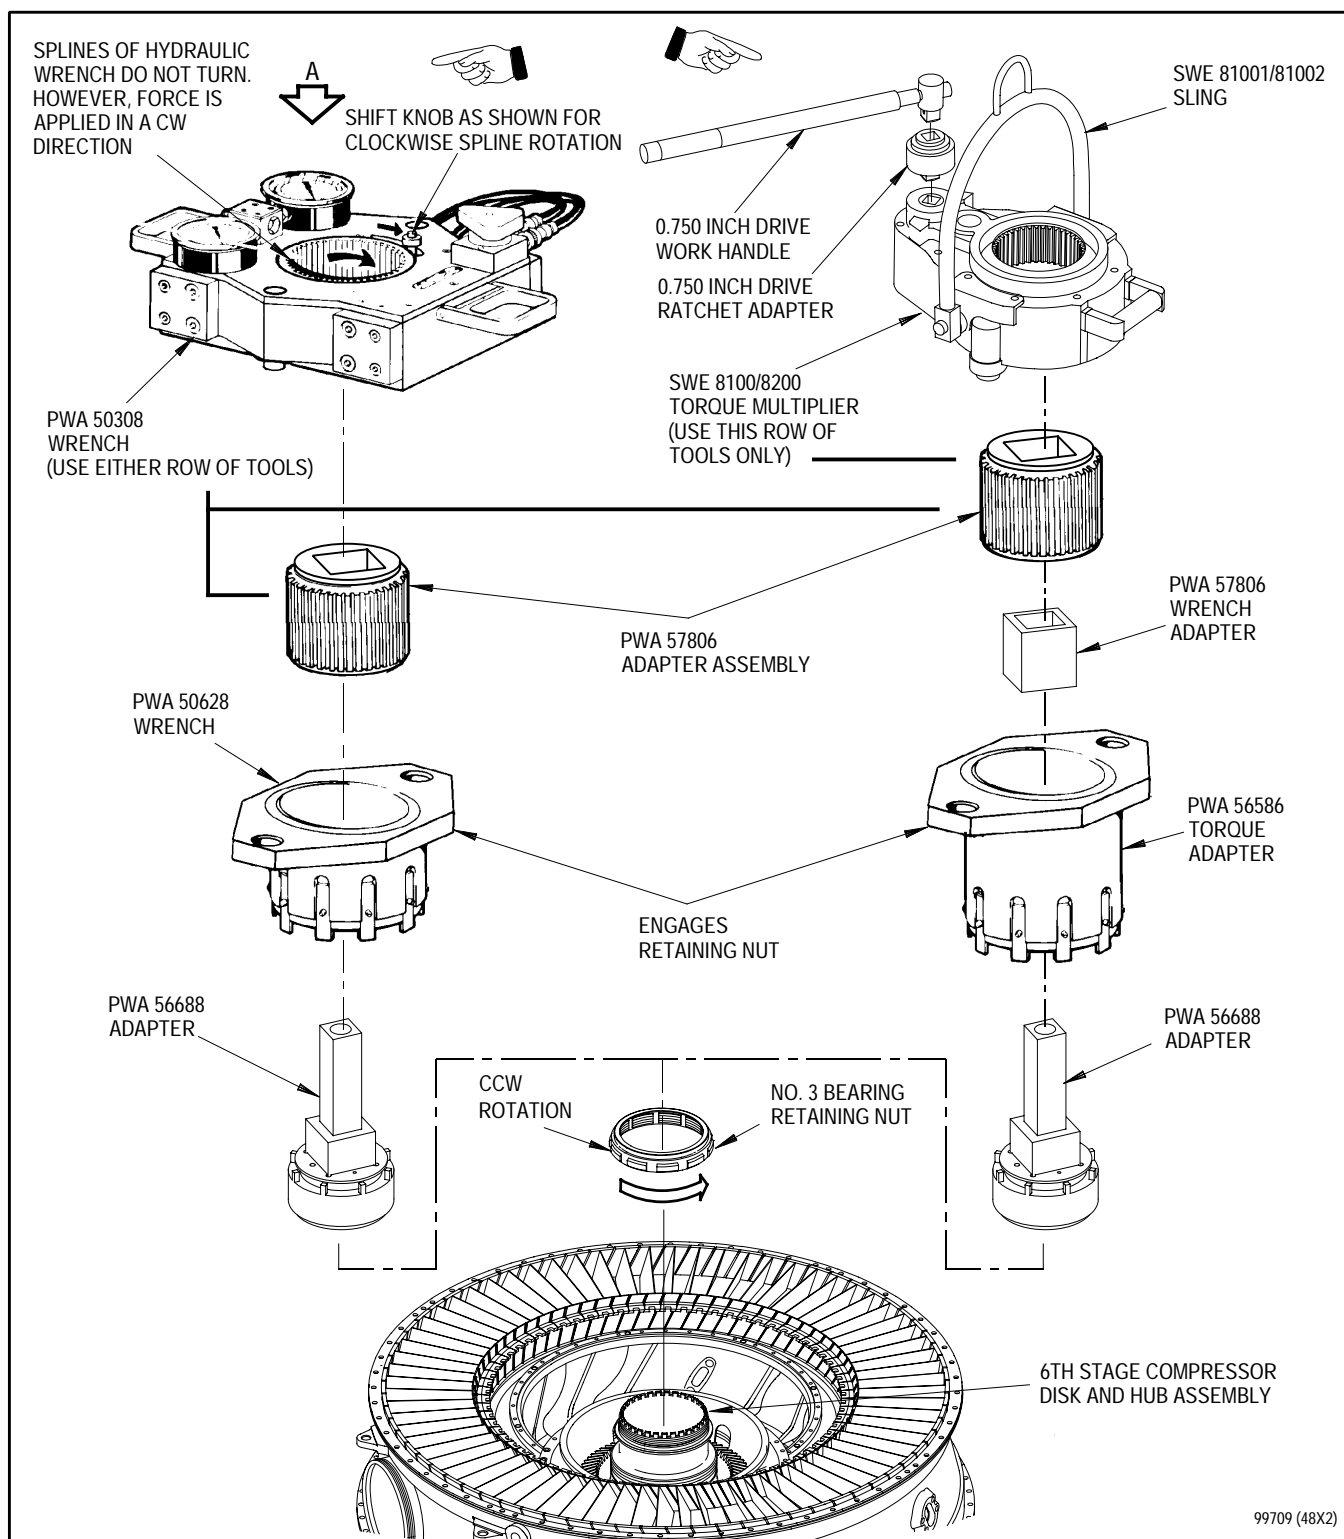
No. 3 Bearing Retaining Nut - Removal (Sheet 1 of 2)
